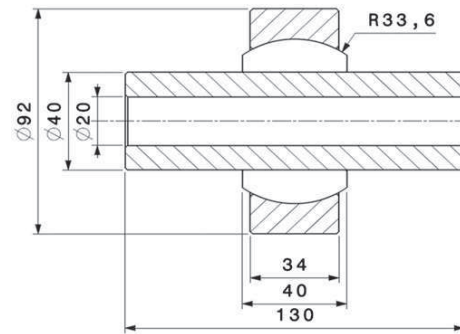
Design of the demonstrator bearing (dimensions in mm).
